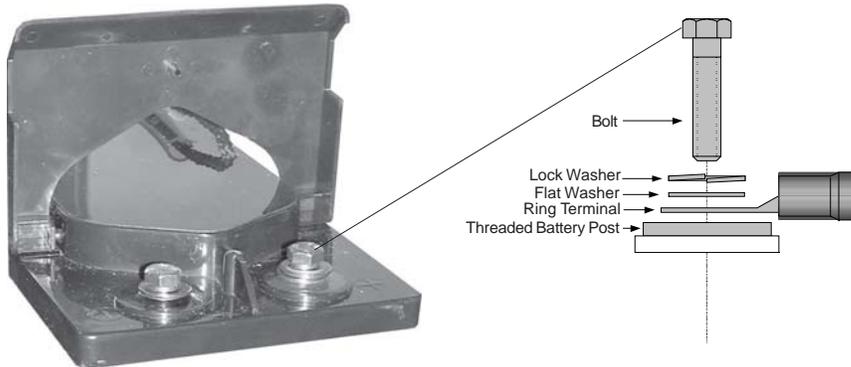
, Typical Ring Lug Assembly for Front Terminal Batteries, Single Lug
